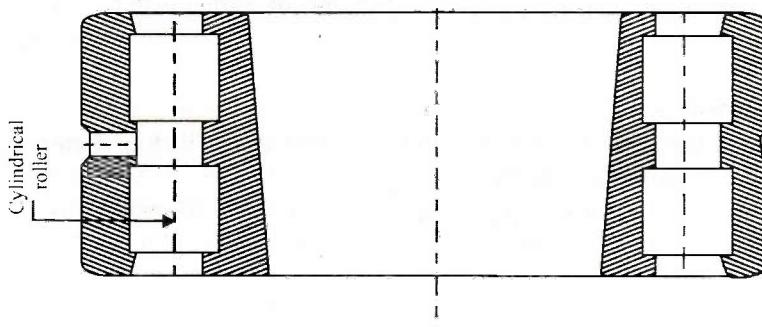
Cylindrical roller bearing with tapered bore.
